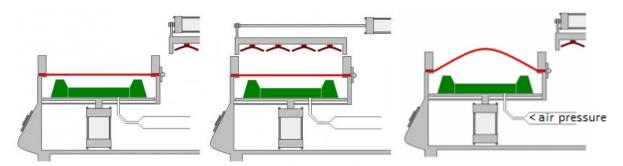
The mould and the thermoplastic sheet is placed in the vacuum forming machine, Figure 32b: The sheet will be heated up & Figure 32c: The sheet is blown spherical (Agulon Kunststoffen, n.d.)
